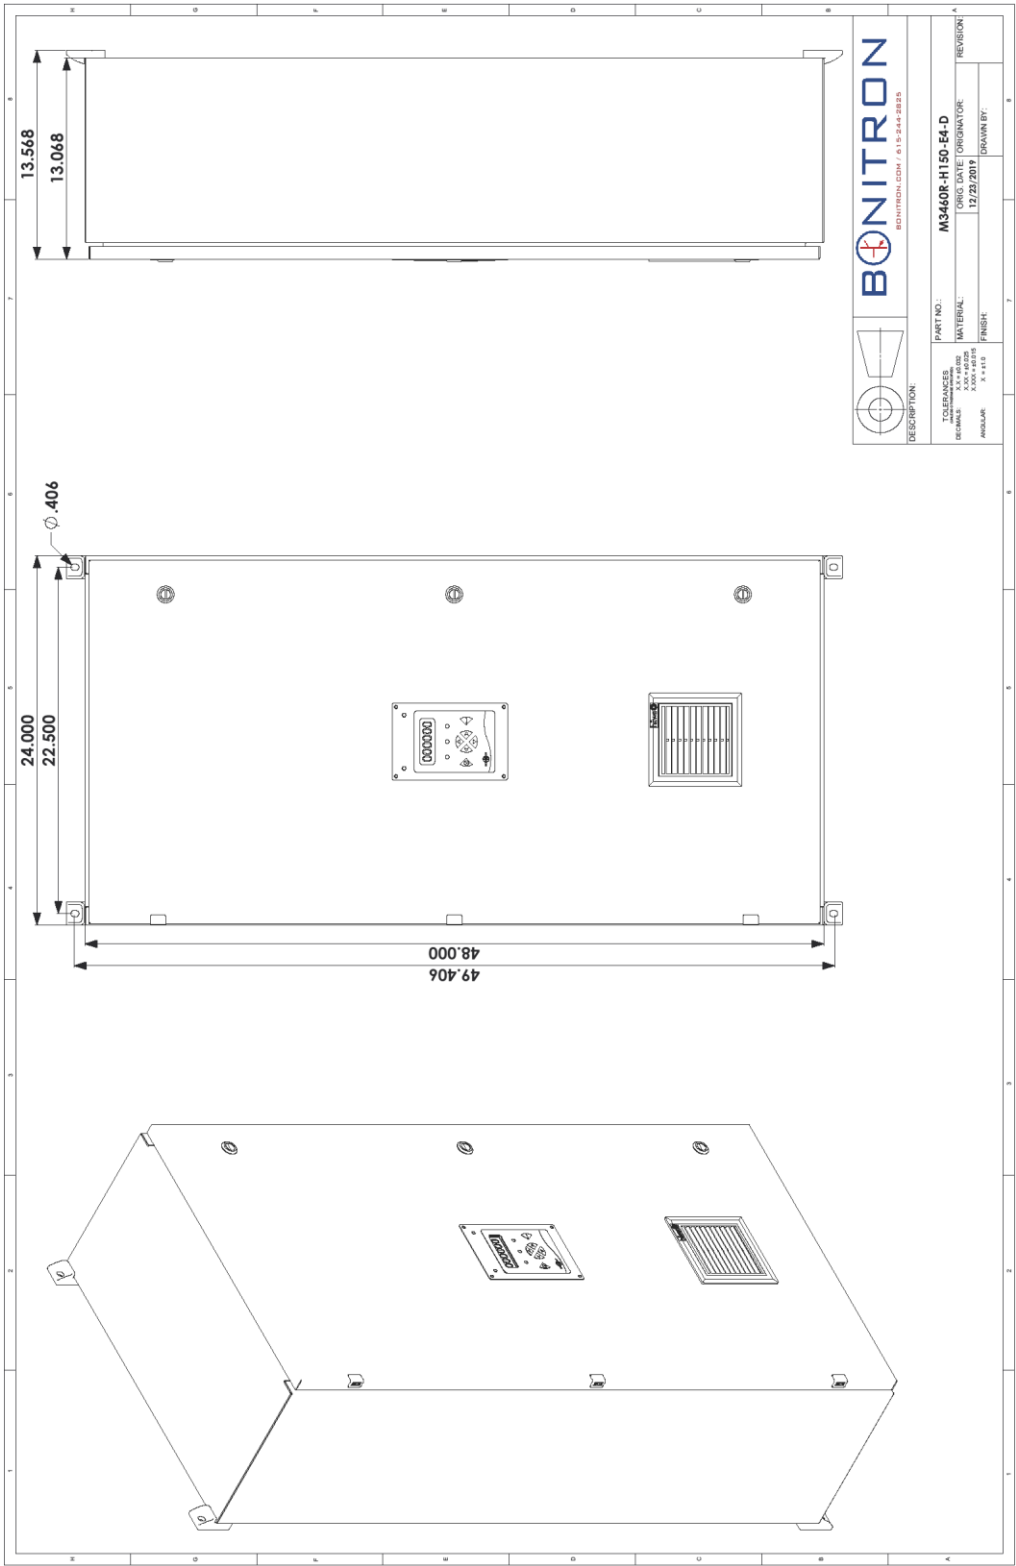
M3460-E4 Enclosure Dimensional Outline
